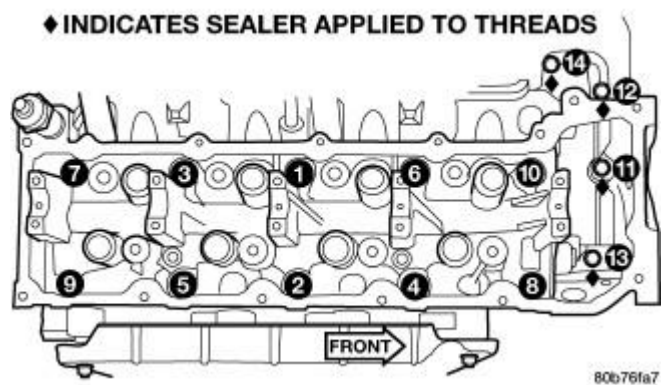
Cylinder Head Bolts Removal/Tightening Sequence
